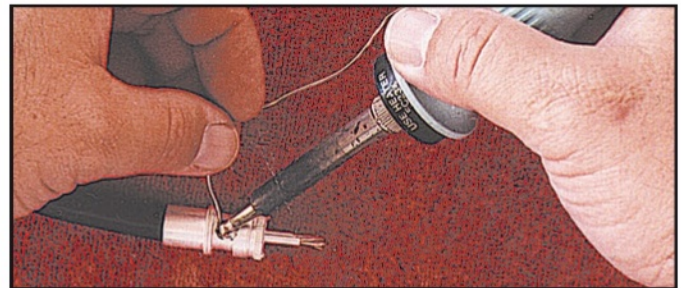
Screw the connector body onto the cable as far as it will go, and solder the shield to the body. When done properly, the molten solder will get sucked into the shield. Solder the center conductor to the center pin, and trim the end. File the end smooth if necessary.
